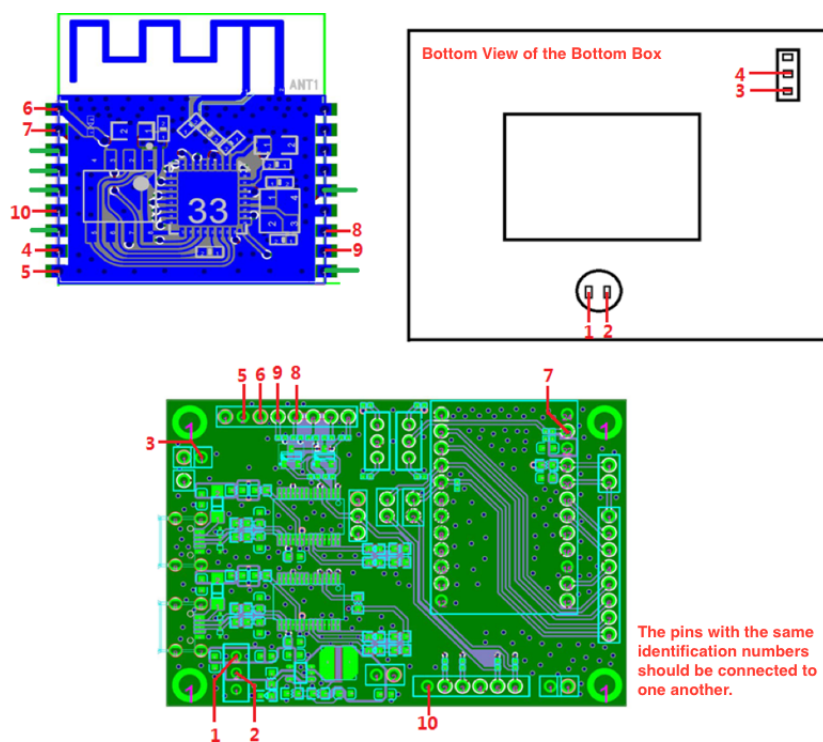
The Wiring of the ESP-WROOM-02 Fixture
